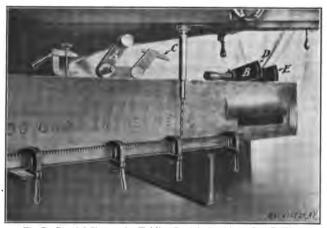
Special Clamps for Holding Rack in Position when Drilling, and Fixtures used for Locating Tumbler Locking Plate
